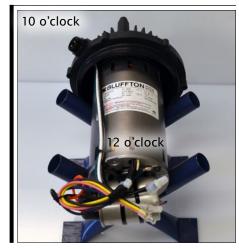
| Install motor base plate onto motor. (Place motor leads at 12 o'clock, and align bulkhead at 10'oclock.)
